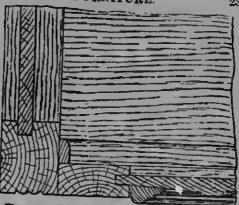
Horizontal Section of Part of Desk Cnpboard on Line C (Fig. 819).
